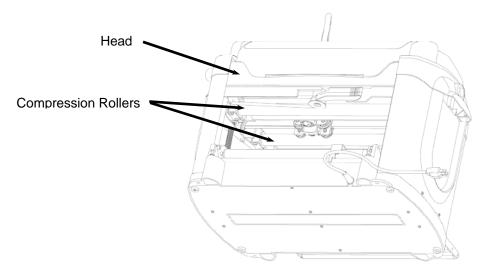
HEAD VIEW SHOWING COMPRESSION ROLLERS
